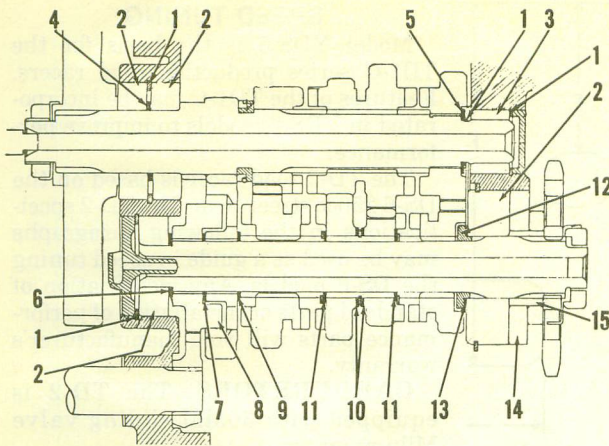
Cross sectional view of the transmission assembly showing location of spacers and washers.
